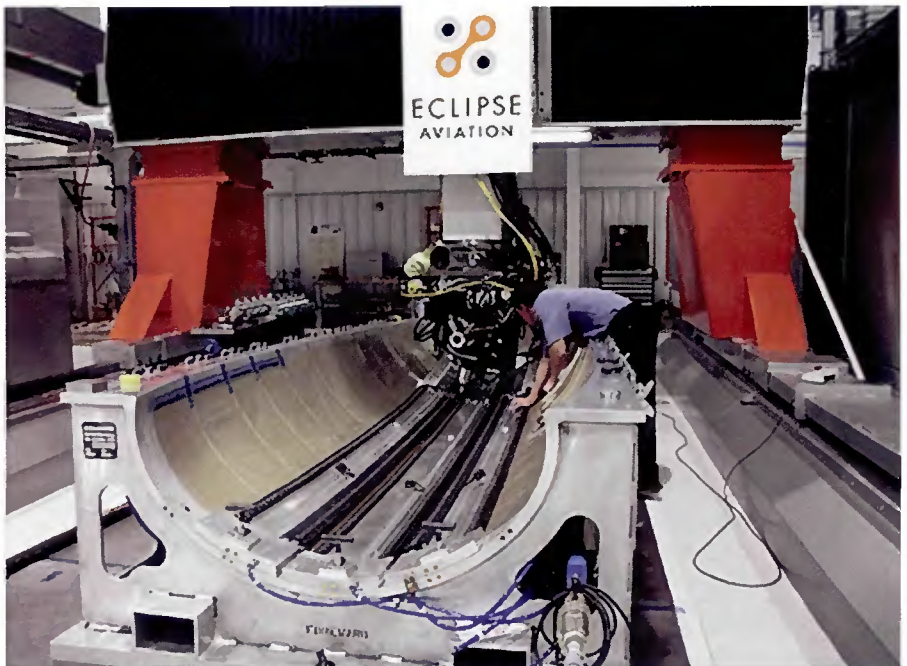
The friction stir welding equipment used to attach the stiffeners and doublers to the Eclipse 500 fuselage sections was designed and fabricated by MTS Systems Corp. It is capable of welding a variety of component geometries through the use of interchangeable holding fixtures located beneath the multi-axis FSW head and movable gantry frame. Courtesy of Eclipse Aviation.
